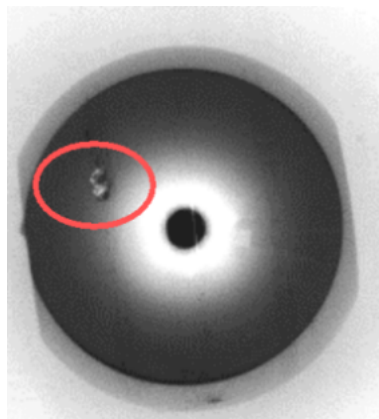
Ball bearing with a spall (Roemer et al., 2008)
